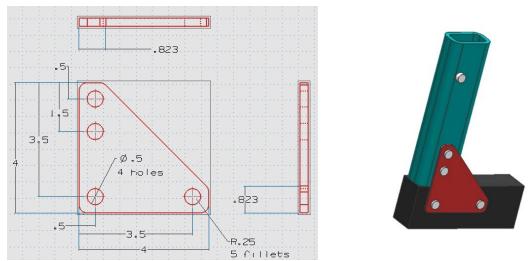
Dimensioned CAD Drawing of Hinge Plate
